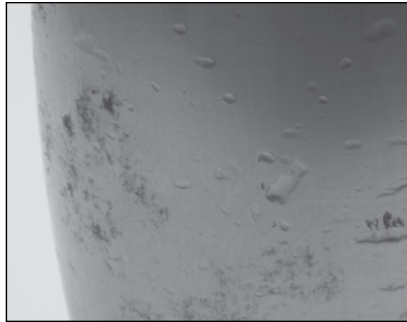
Hard particles caused contamination bruising on this spherical roller bearing.
